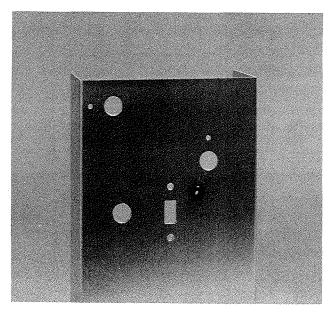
Mark II Mule Tx case back. All holes have been drilled for mounting the Galloping Mule Conversion Kit.
